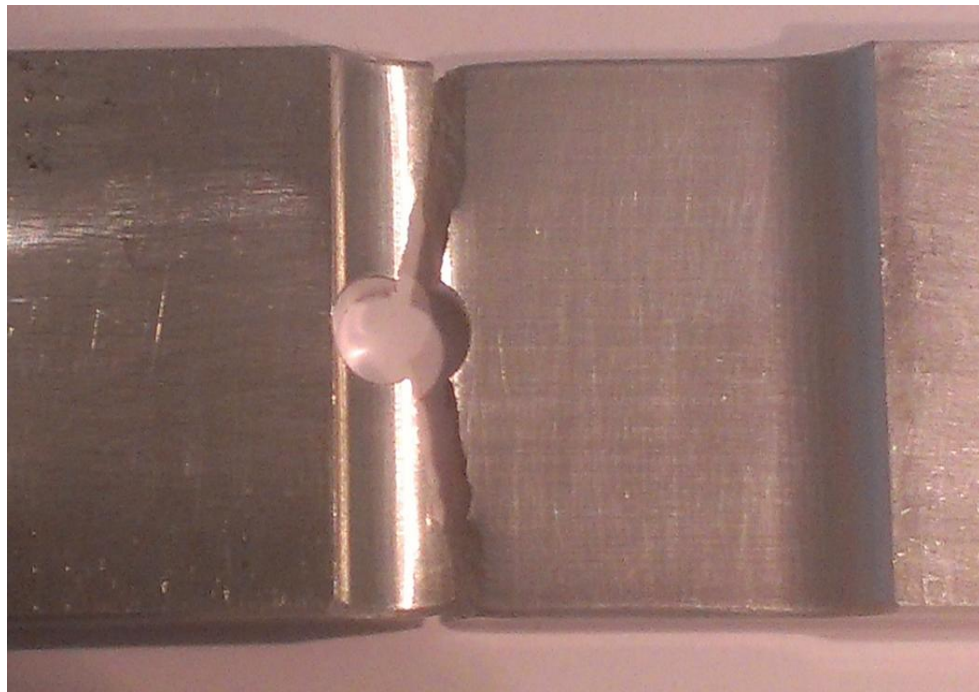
Close-Up Picture of Post-Test Open Hole in Radius Test Specimen -6
